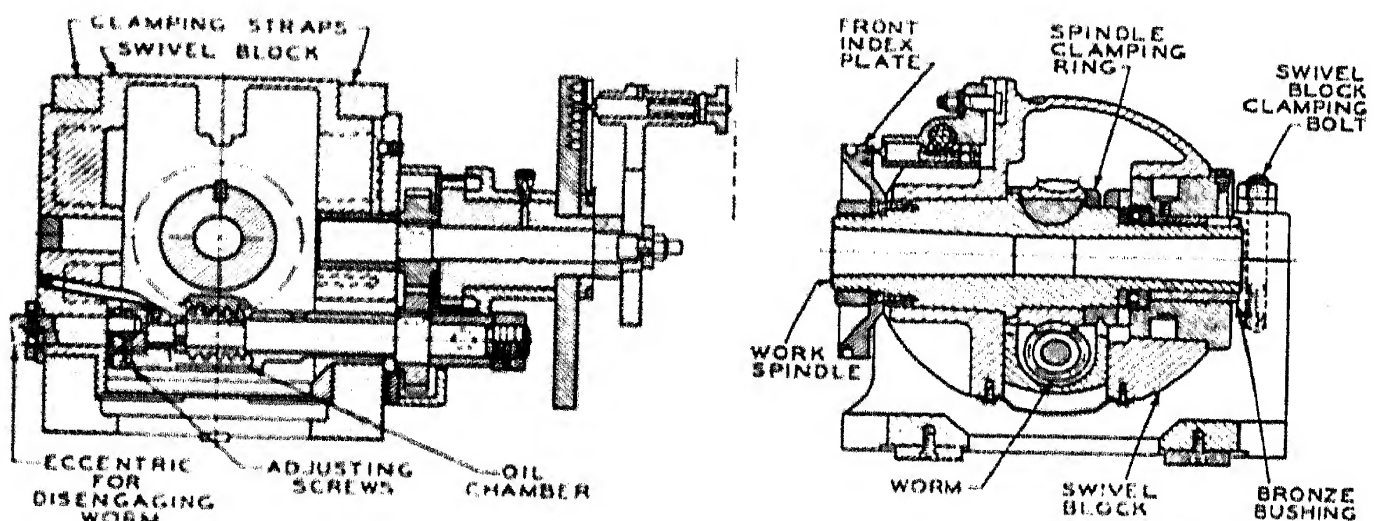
Sections through a universal dividing head to show the indexing mechanism. (Courtesy The Cincinnati Milling Machine Co.)
